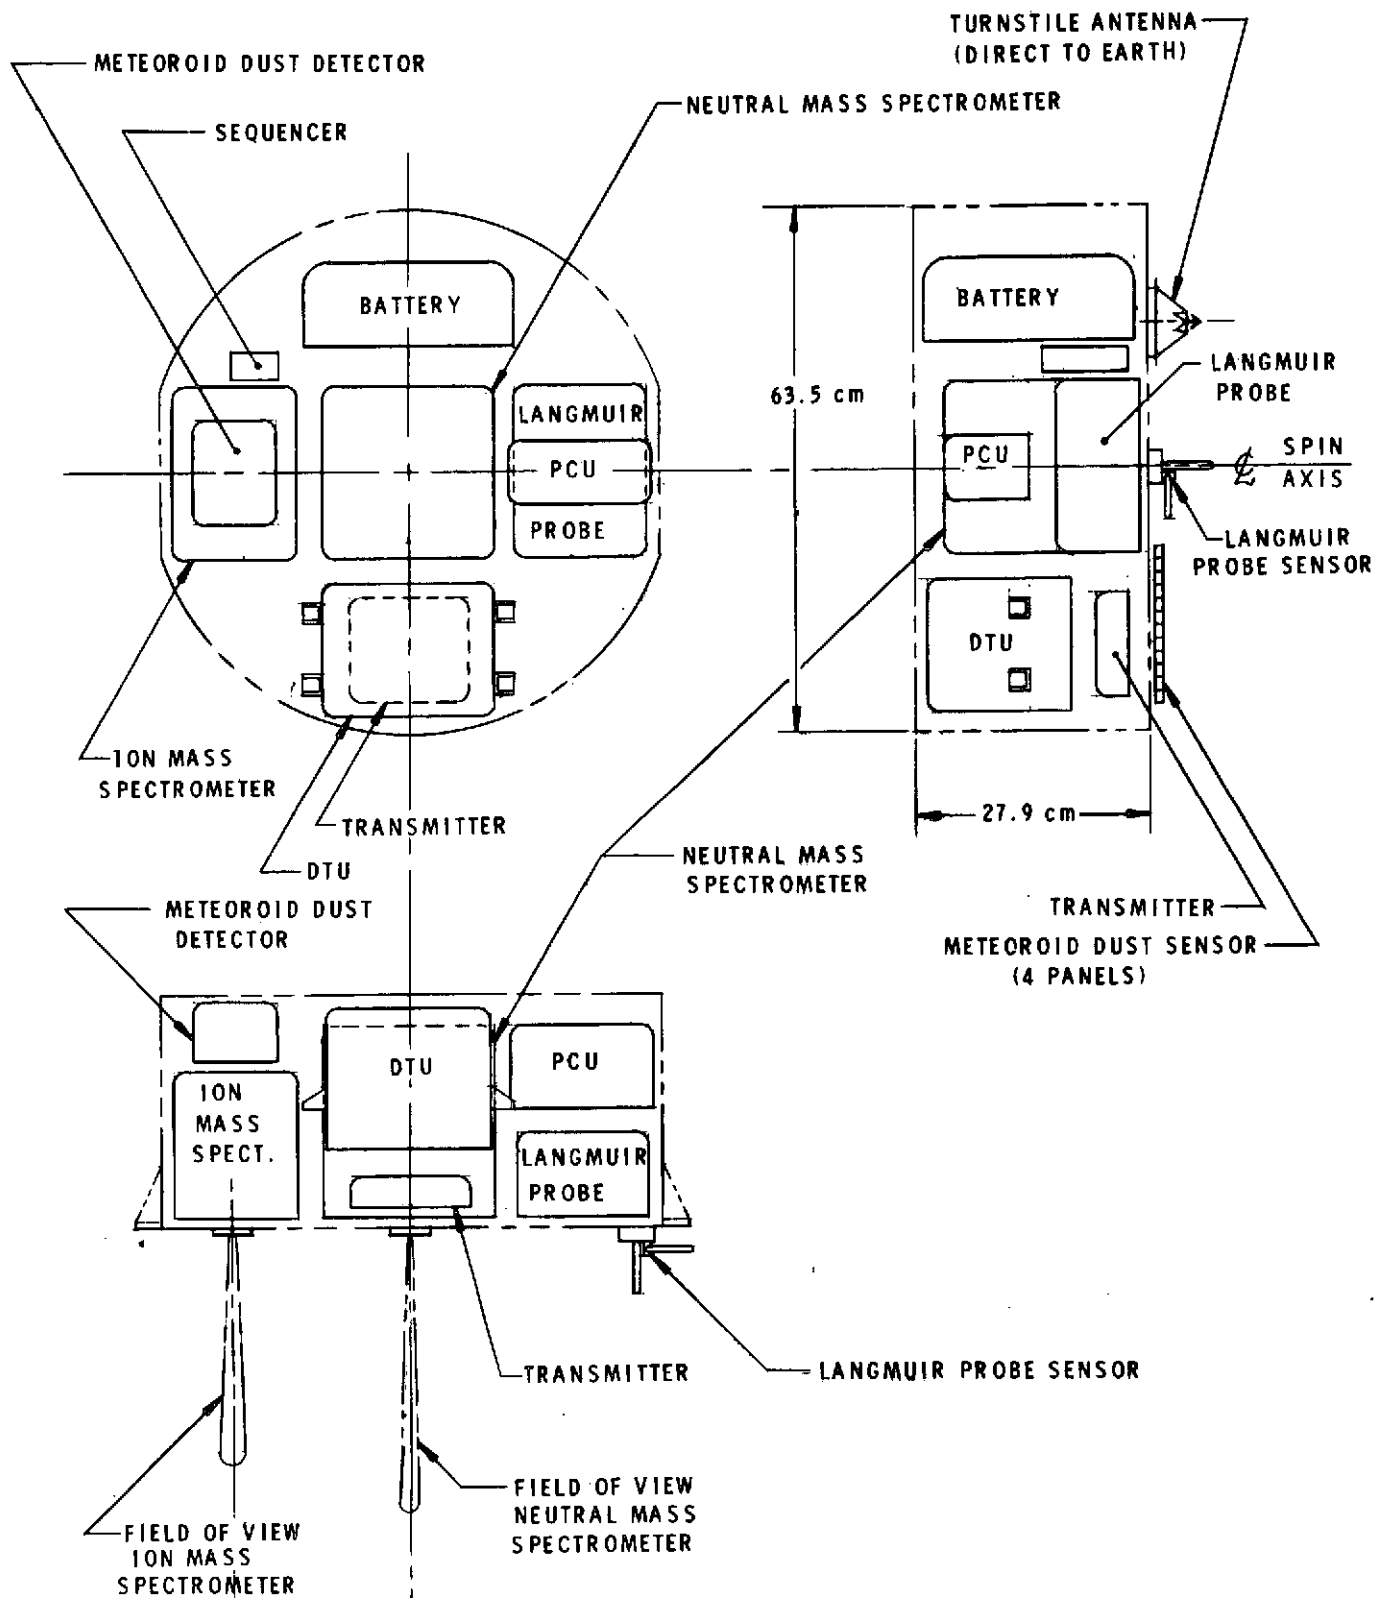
PROBE EQUIPMENT ARRANGEMENT CONCEPT
